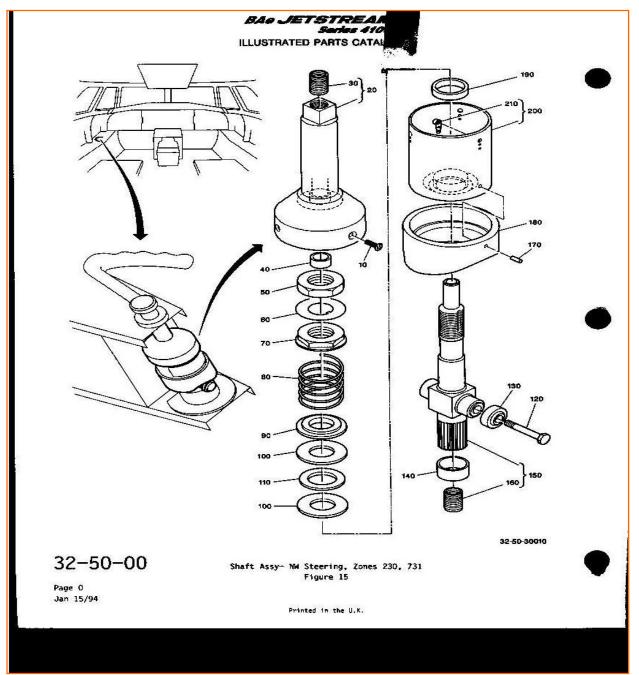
An exploded view of the Shaft Assembly for the Nose Wheel Steering, showing the Spring loaded cam which will center the nose wheels when the applied hand pressure are removed from the tiller.
